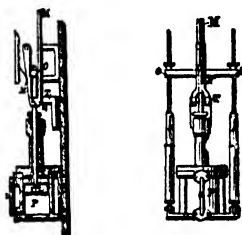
Brake Arrangement for Trains on Telfer System (elevation and section).
